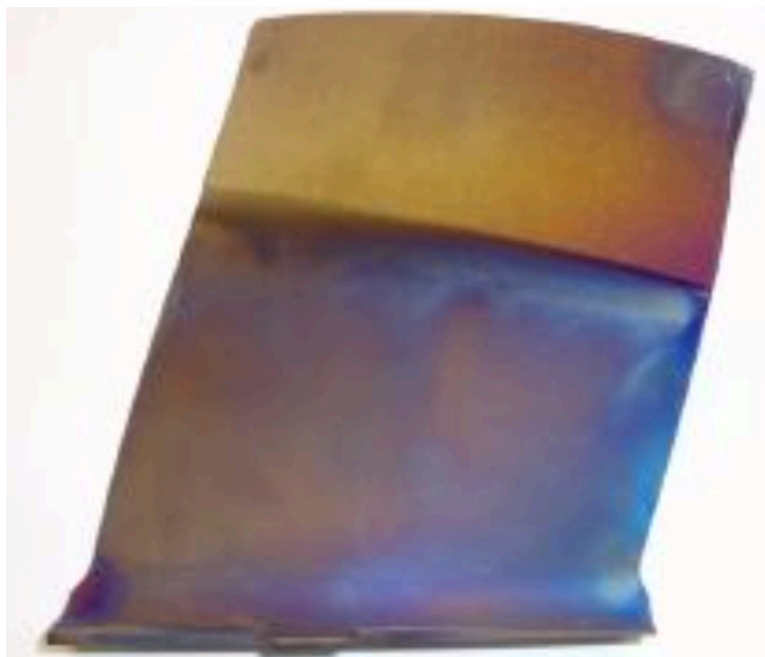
Compressor blade coated with NiTi SMA (courtesy of ADVACT)
